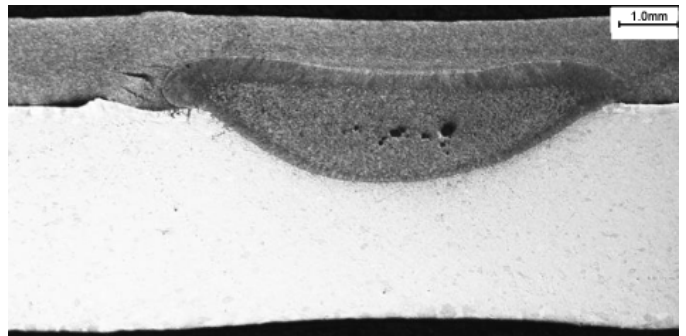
General view of the weld joint with visible cracks and porosity in the welding nugget, etched with Ma1Al
